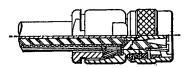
D-Assembly instructions-C Type plugs and sockets-Pressure sleeve cable clamp
